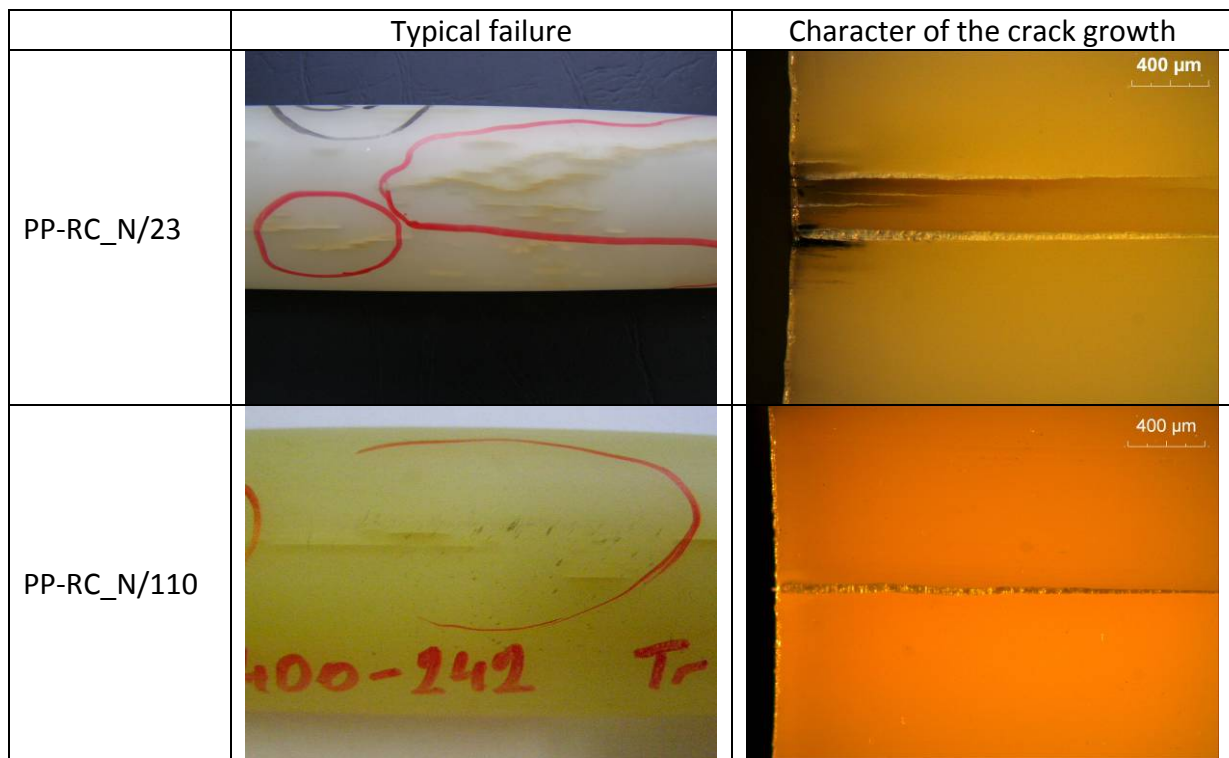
Typical failure of original and annealed pipes from PP-RC_N. Character of craze-shape cracks grown through the pipe wall is shown.
